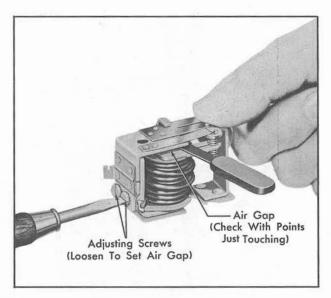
Checking and Adjusting Cut-Out Relay Air Gap
